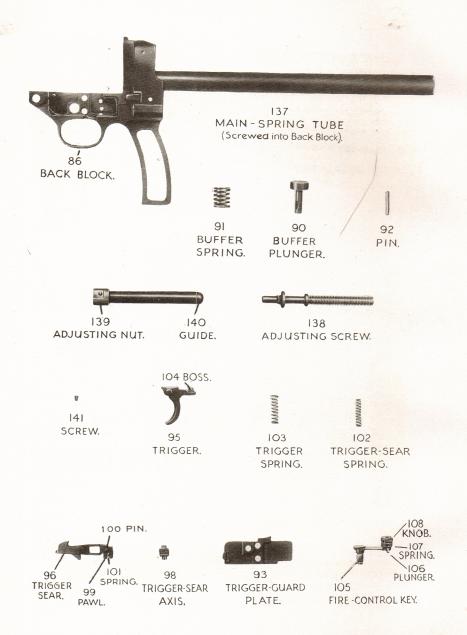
Back Block, with Main-Spring Tube and Details of Trigger Gear, etc.
